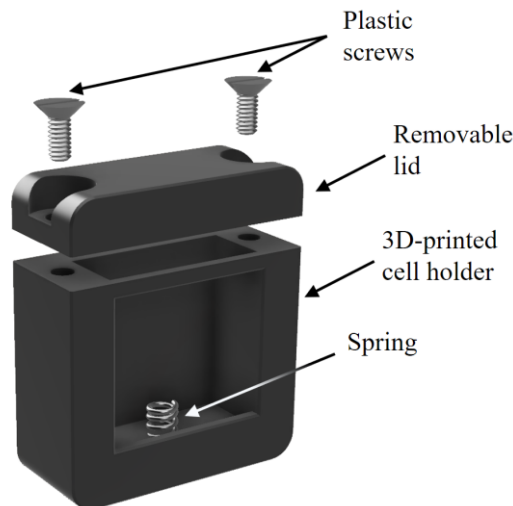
Exploded-view drawing of 3D-printed LC laser cell holder
